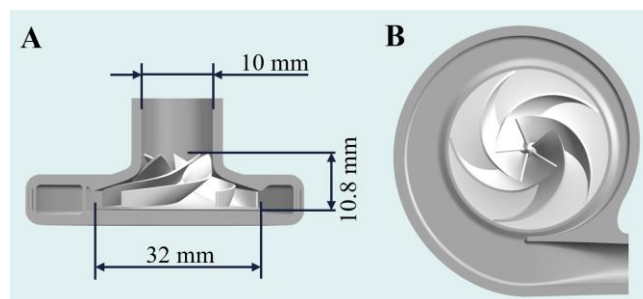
A: Side-view of the CAD model of cut-open housing and impeller design that served as baseline for the CFD simulation, B: Top-view of the CAD model of baseline impeller and cut-open housing.
